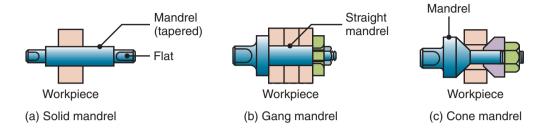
Various types of mandrels to hold workpieces for turning; they are usually mounted between centers on a lathe. Note that in (a) both the cylindrical and the end faces of the workpiece can be machined, whereas in (b) and (c) only the cylindrical surfaces can be machined.
